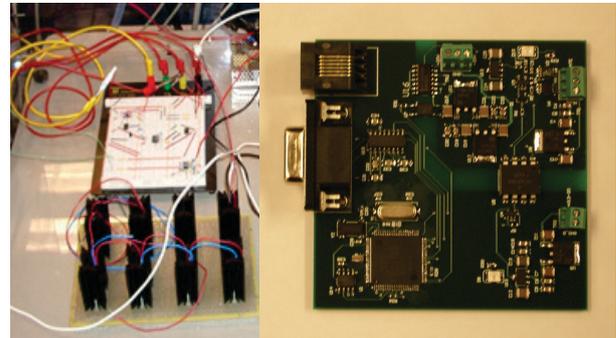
Photographs of CM circuits. Left: Prototype circuit on breadboard. Right: Components integrated onto 3"×3" printed circuit board.
